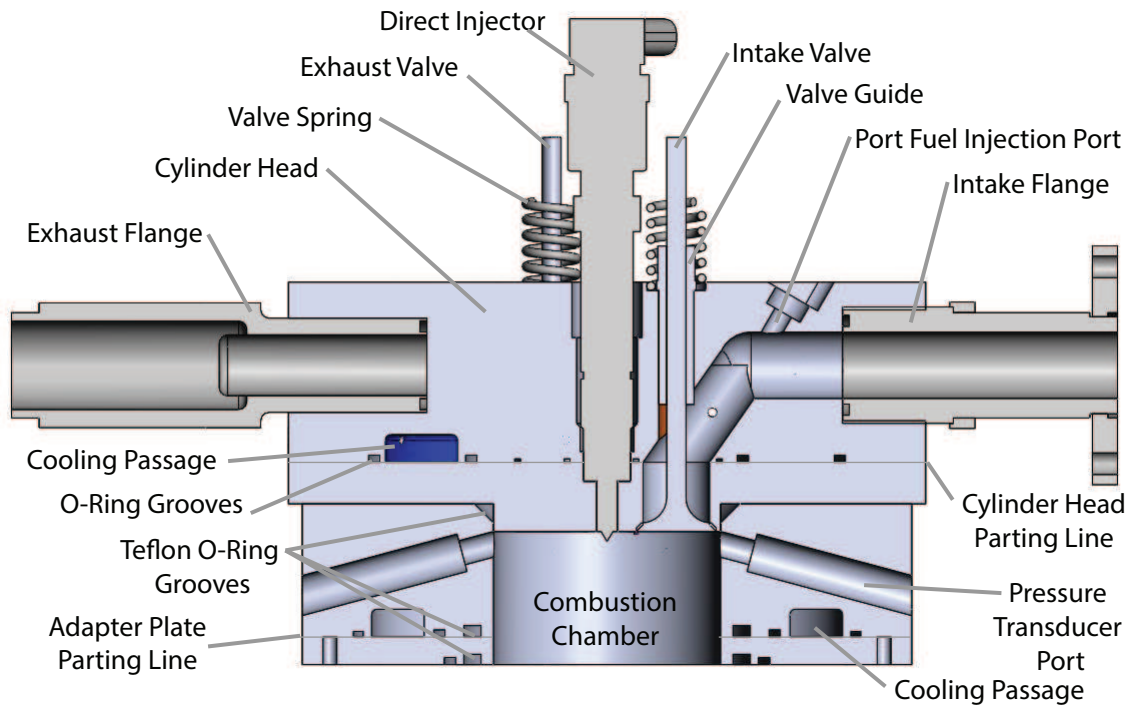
A close-up, cross-sectional view of the cylinder head and adapter plate.
